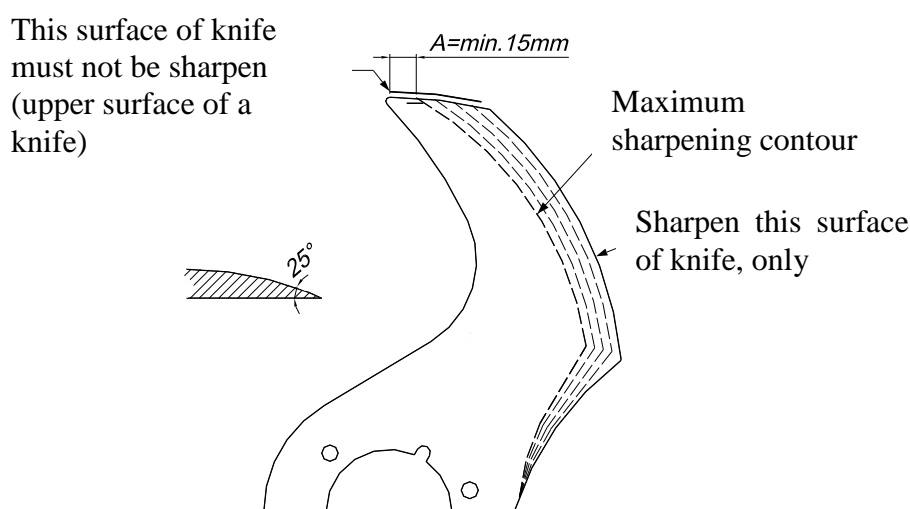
KN-125 cutter knife type U2 profile and angle of blade to sharpen.
